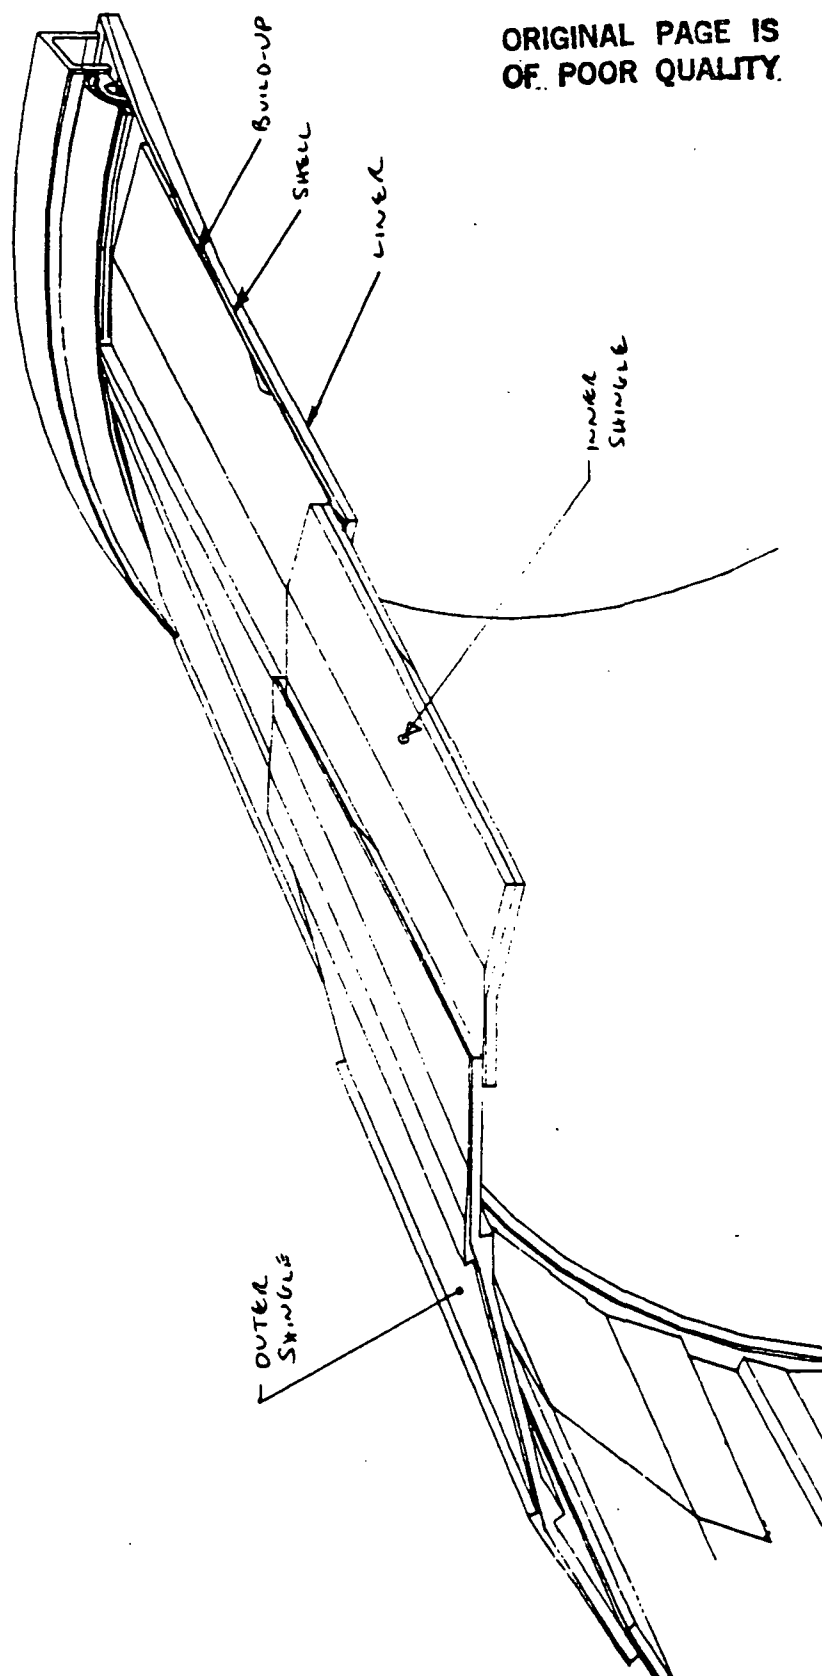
Enlarged Detail of Cutaway SRB/SLEEC Isometric View
